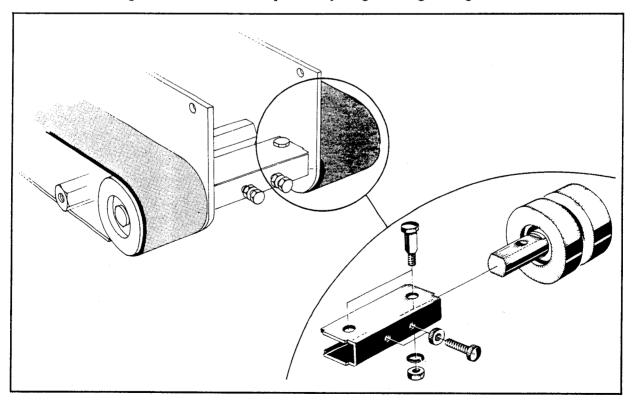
BOX DRIVE BELTS - TAPING HEADS
